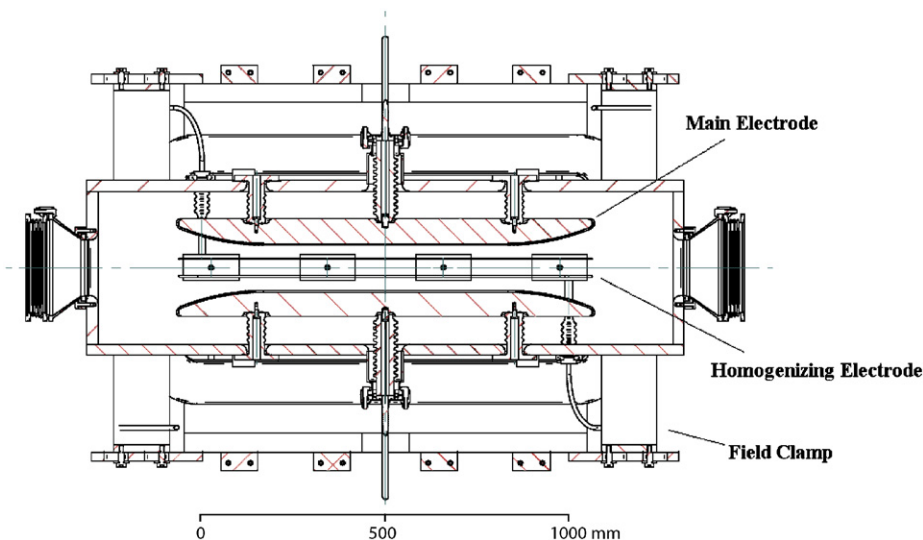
A top view of the horizontal midplane of the Wien filter is shown. Electrostatic dipole is mounted inside the magnet.
